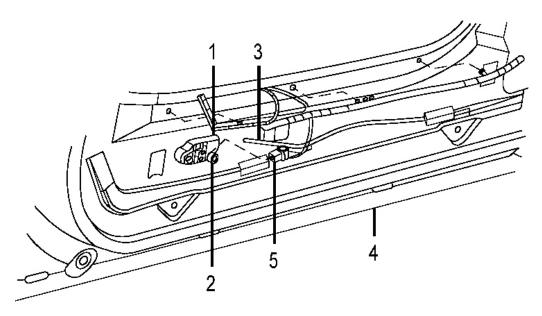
Identifying Electronic Frontal Sensor (EFS) Courtesy of ISUZU MOTOR CO.
